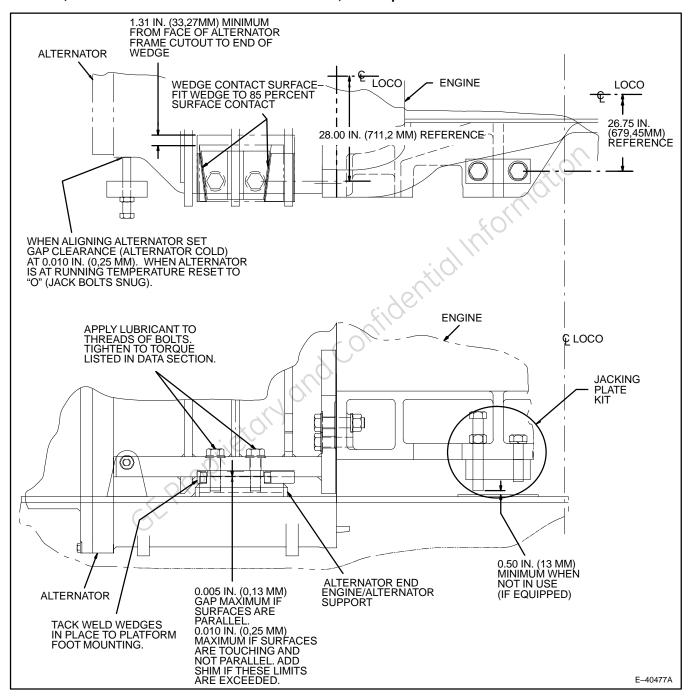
Engine And Alternator Mounting Arrangement, Alternator End.
